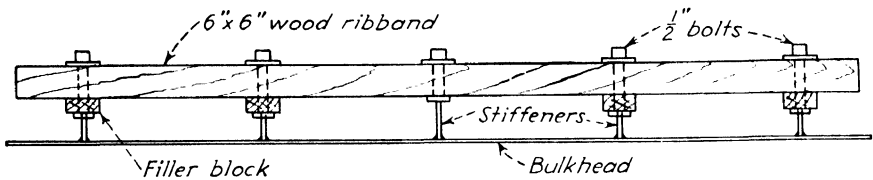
Wooden ribband showing filler blocks where depth of stiffeners varies.
